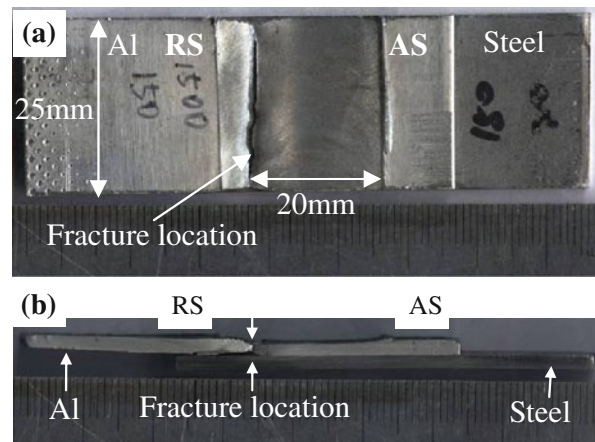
Fracture location at RS within Al (but not along initial faying surface) after tensile shear test for a typical friction stir brazed joint produced at 150 mm/min × 1500 rpm.
